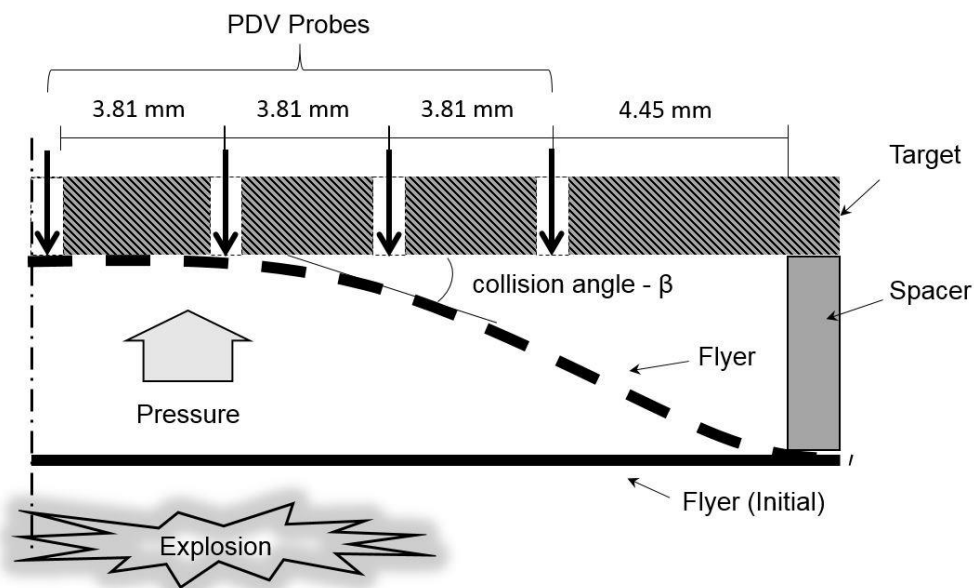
A schematic showing collision angle measurement by multi-probe PDV during impact welding
